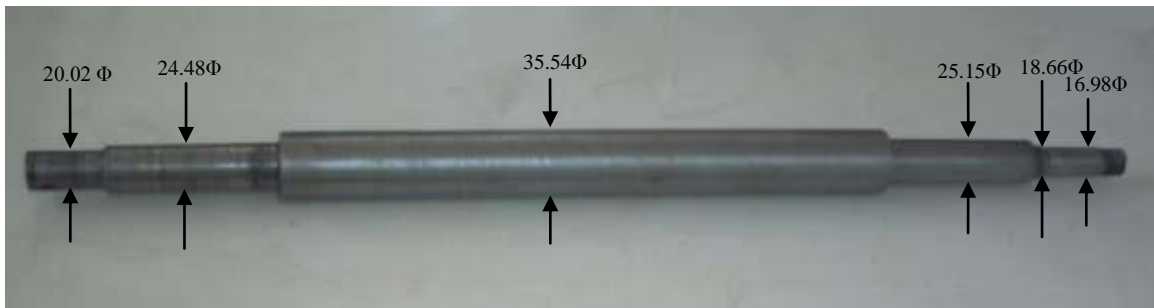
Photograph of the spooled shaft (all dimension in (mm)).
